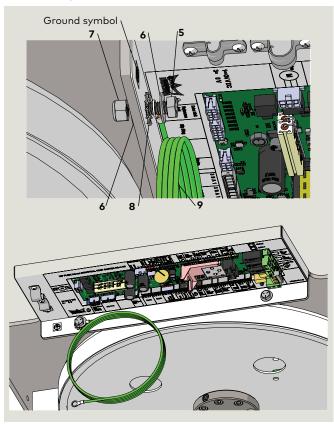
Motion Assist 360 control mounting to top drive plate
